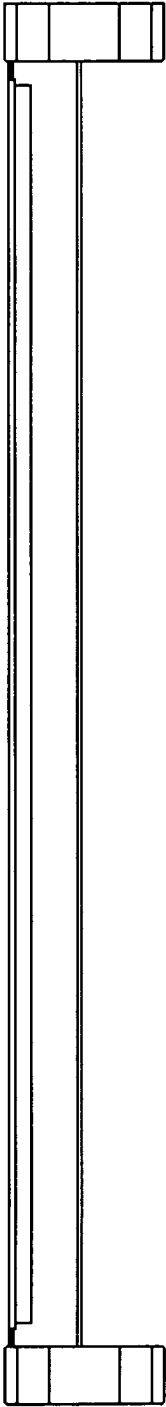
A: Left view of a ceiling frame (40 foot collapsible cargo container)
